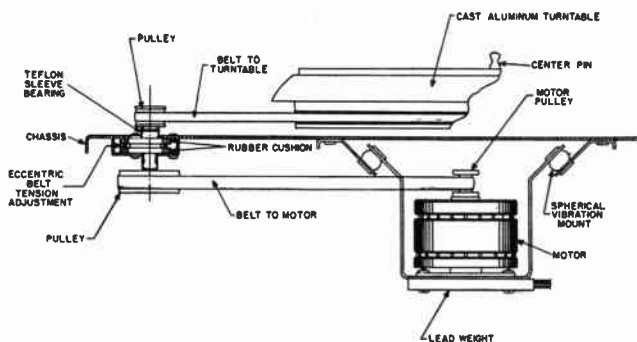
The Fairchild 412-1 turntable mounted in a hardwood cabinet which accommodates also the 280 transcription arm. Entire unit is large, but a belt drive from motor to idler and another belt drive from idler to turntable holds rumble to a minimum. Fig. 5 (above). Cross-sectional view of the 412-1 turntable showing relative position of the various elements.
